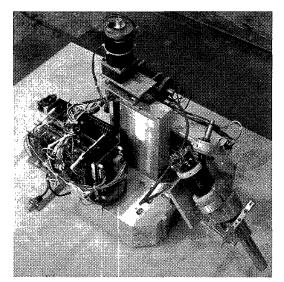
Developed welding mobile robot and arc sensor system
